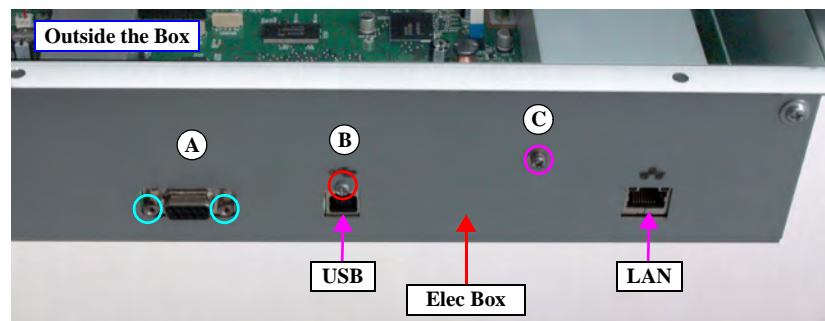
Removing the screws of MAIN BOARD ASSY (outside)
